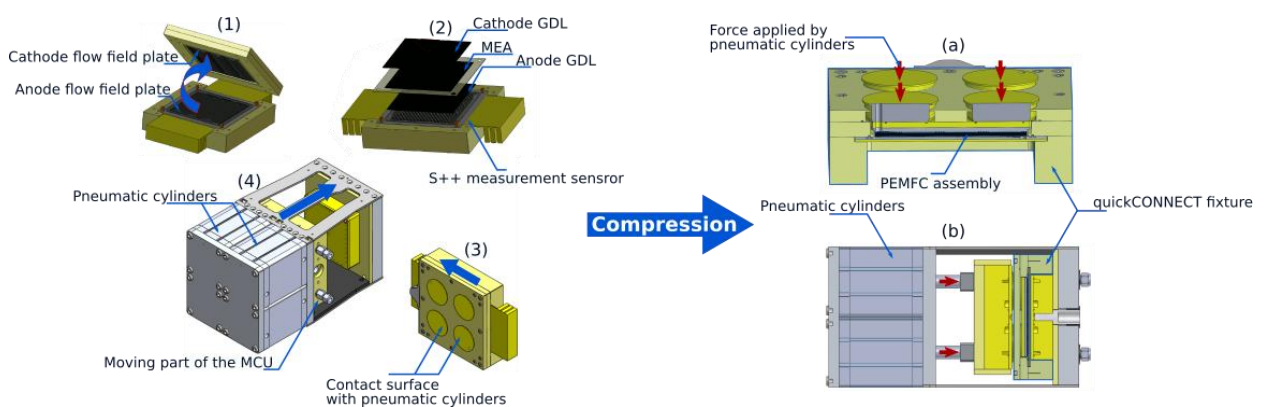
Mechanical compression unit. Left: (1) opening of the qCf, (2) assembly of the PEMFC components, (3) placement of the qCf, (4) application of the mechanical assembly compression by the four pneumatic cylinders (images courtesy of balticFuelCells GmbH,
